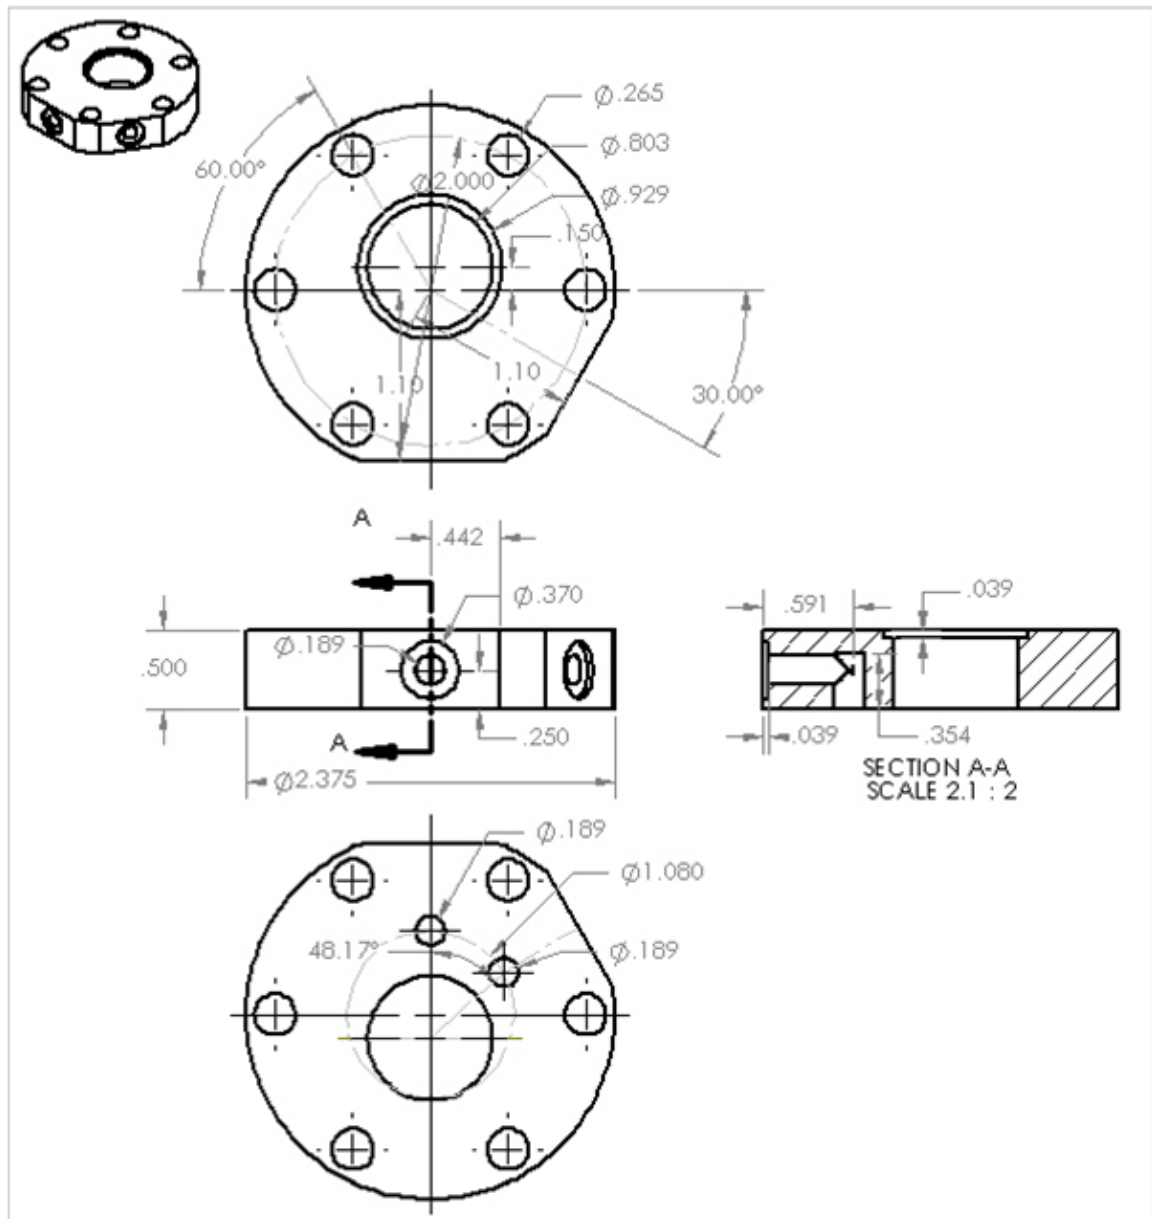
Large test casing top manifold showing liquid inlet and vapor outlet ports.
